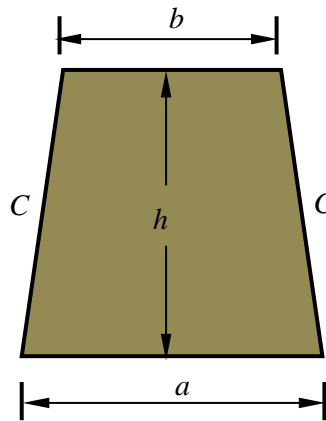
Projected area of the tool pin of taper threaded cylindrical used in the experiment.
